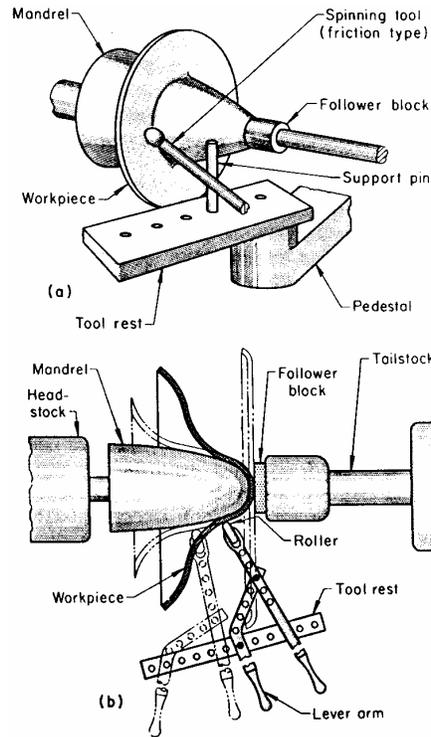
Two examples of manual spinning using a lathe. (a)—A simple setup using a hand tool applied as a pry bar. (b)—A setup using scissor-like levers with a roller tool.²²
